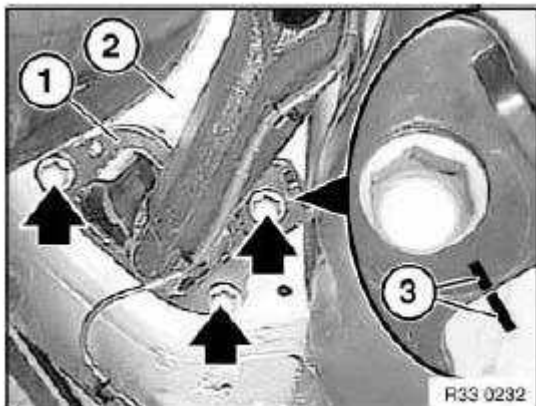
Locating Mark Position Of Bearing Block To Body With Colored Mark
